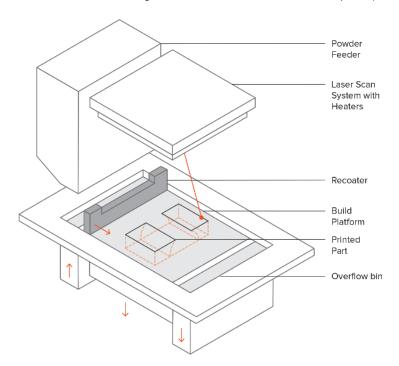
Illustration of a Selective Laser Sintering Machine which shows the name of parts (3Dhubs)
